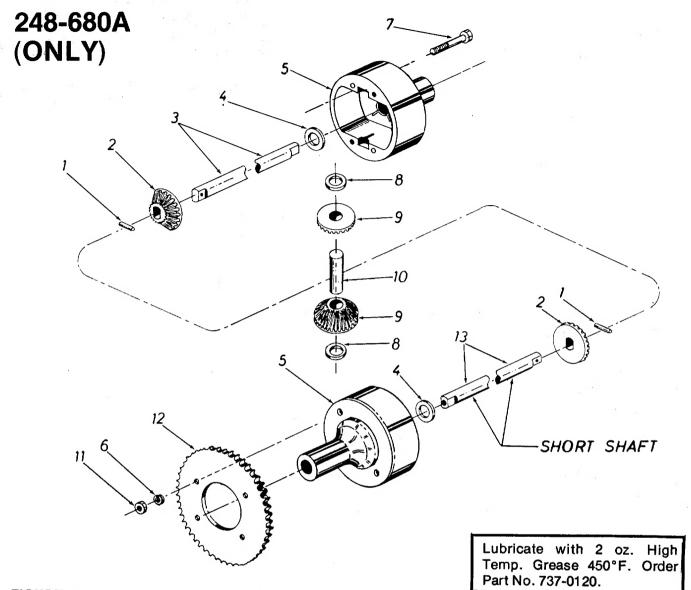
MODEL 717-0353 DIFFERENTIAL ASSEMBLY
